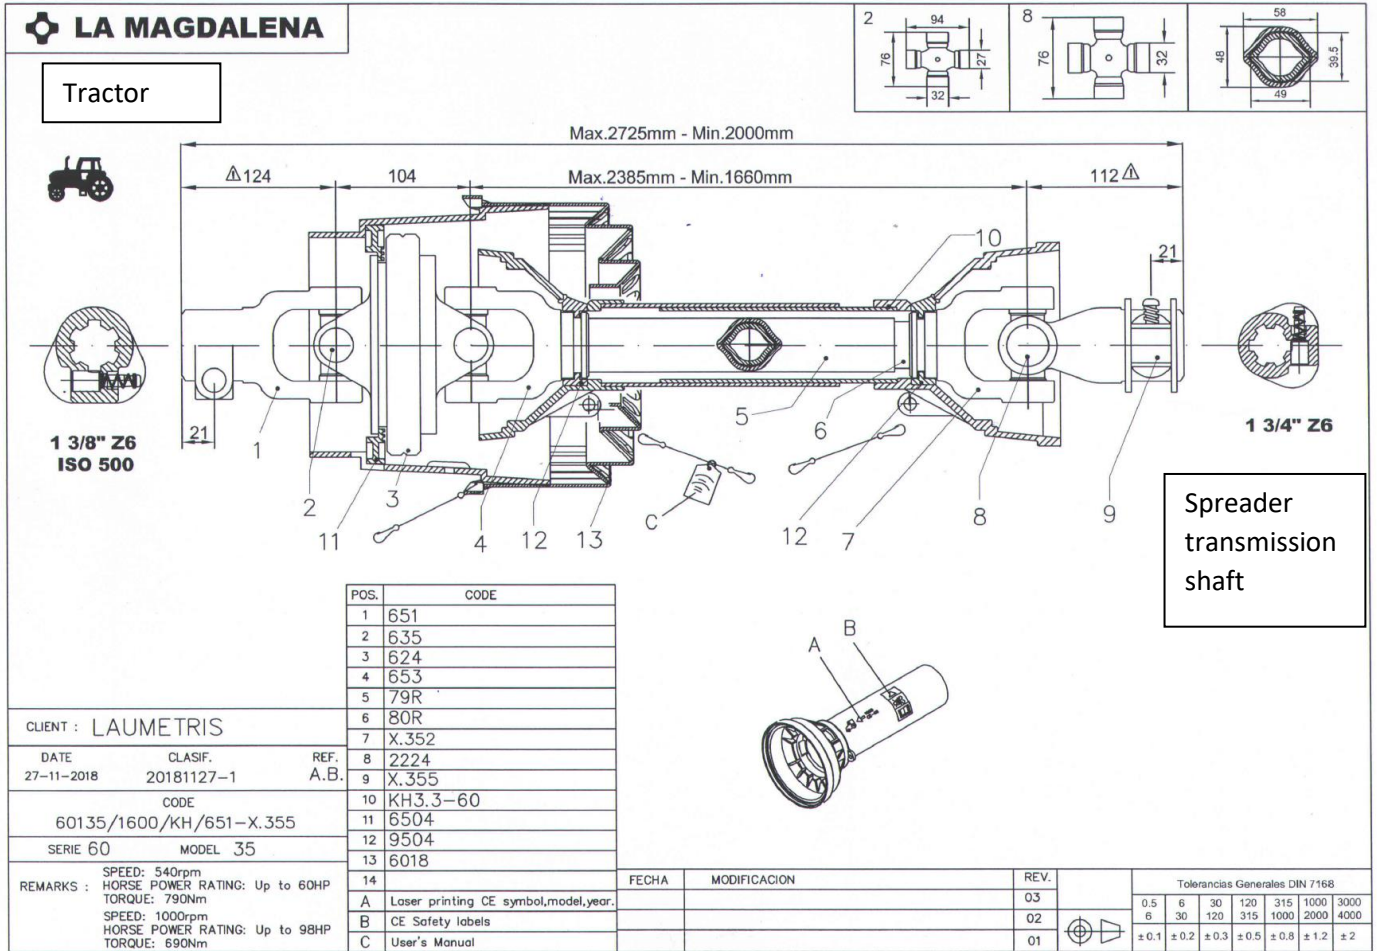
Pto shaft connecting tractor to the manure spreader schematic
